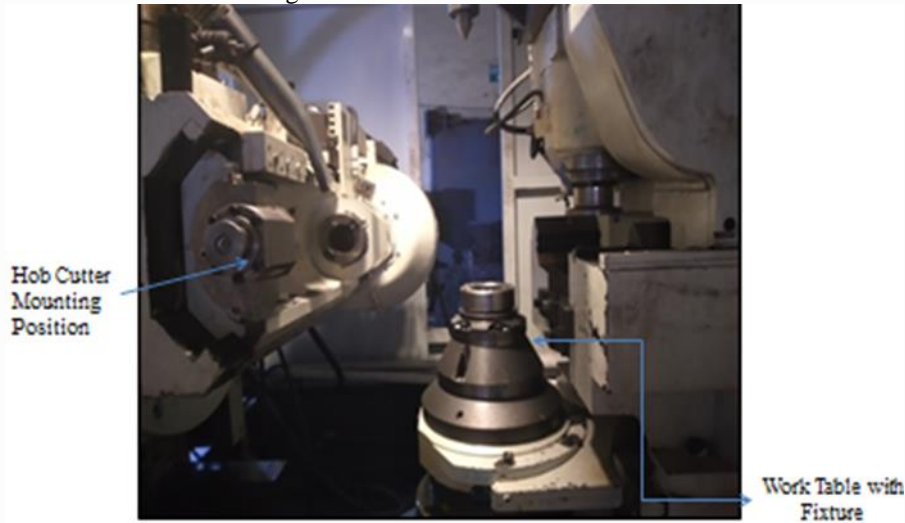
Shobber 300 Gear Hobbing Machine[17]
